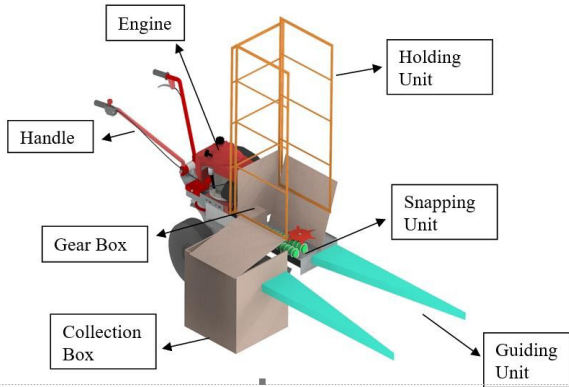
Components of Maize Stalk cutter cum cob picker machine
